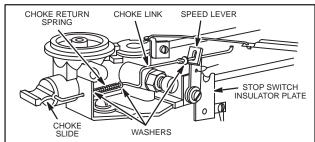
CHOKE-A-MATIC® LINKAGE
